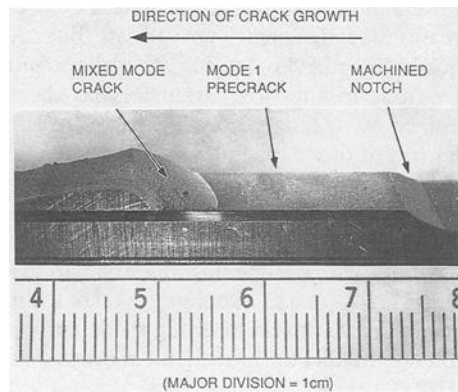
Photograph of the fracture surface of a specimen with 5% side grooves showing the crack deviating from the side groove.
